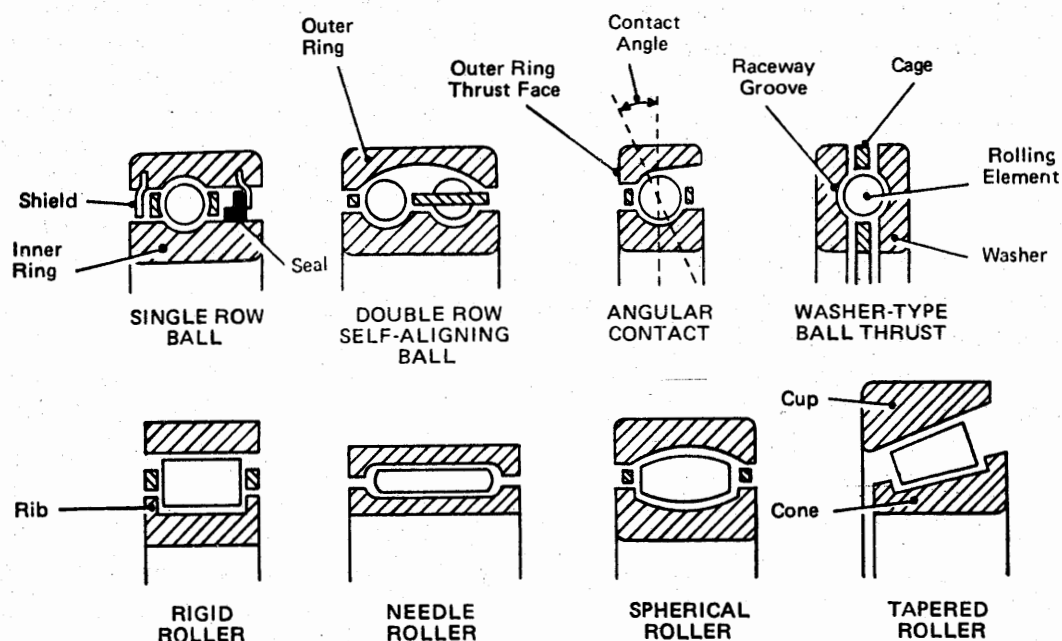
EXAMPLES OF BALL AND ROLLER BEARINGS
